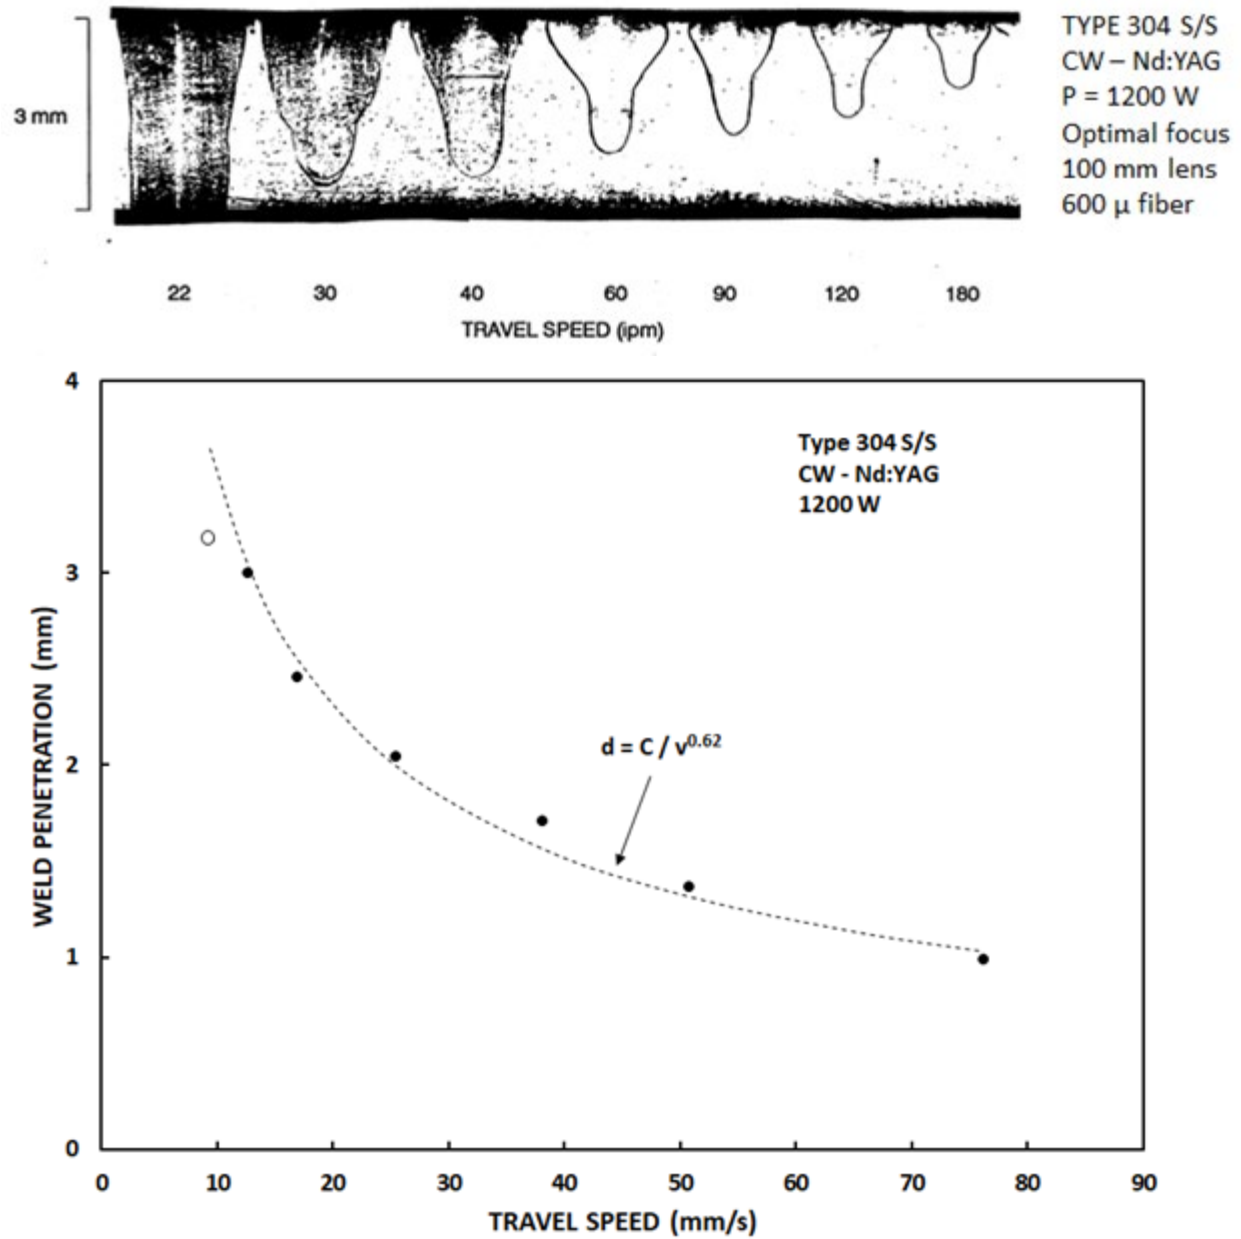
Data showing how weld depth of penetration depends on weld travel speed for LB welds in Type 304 stainless steel. These results are from a CW-Nd:YAG laser using a short focal length lens.
